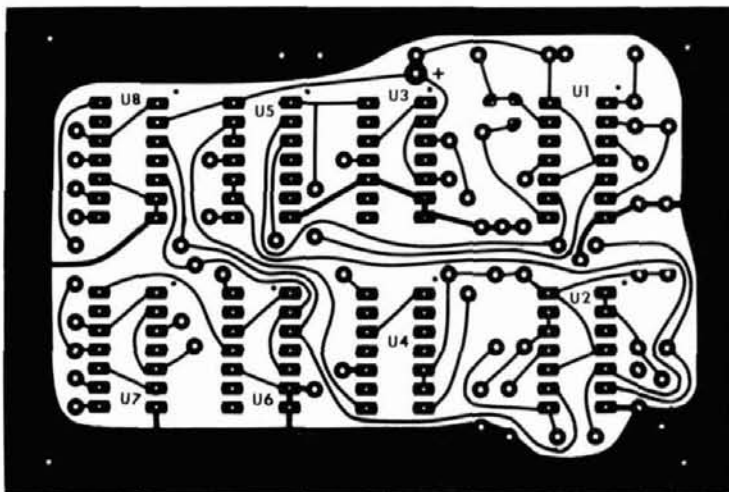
Full-size printed-circuit layout for the Accu-Keyer speed readout. Parts layout is shown in fig. 4.
